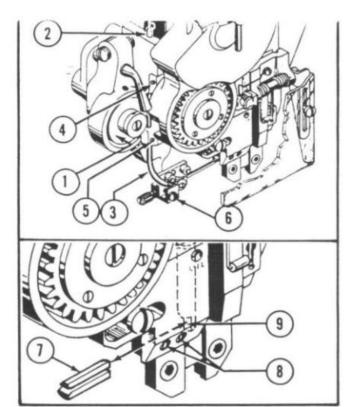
Inspecting Wire Feed Gears, Tubes, and Stationary Cutter
